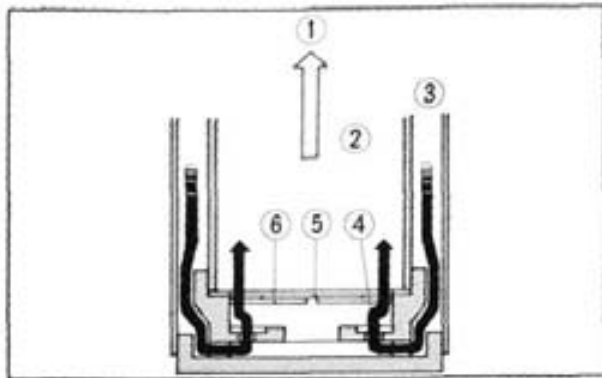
① Extension side ⑤ Bottom valve spring
